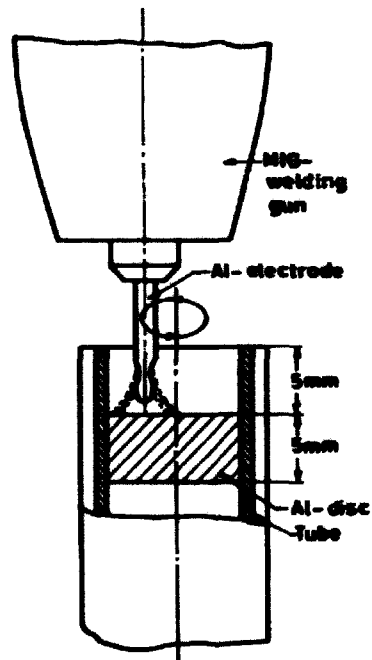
Arrangement for making end closure of multifinned SAP tube by low-current MIG-welding.
